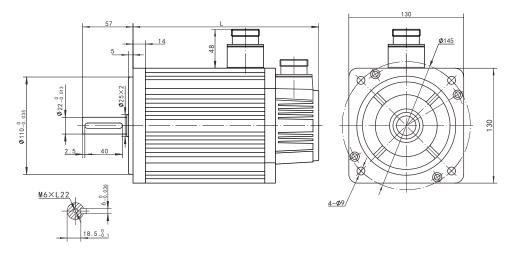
Installation dimension drawing of WE series 130 flange servo motor
